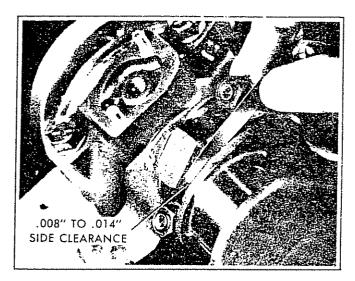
A2-37--Measuring Connecting Rod Side Clearance-Typical (V6 Shown)
